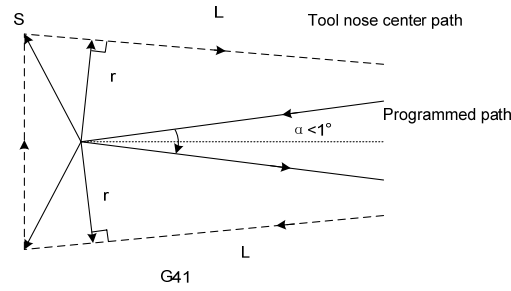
Linear—linear ($\alpha < 1^\circ$, moving inside)
